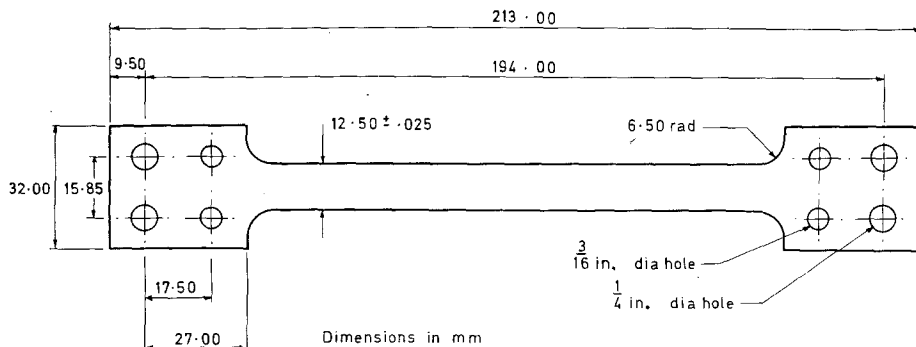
Dimensions of strip test piece 1.69 mm thick.
